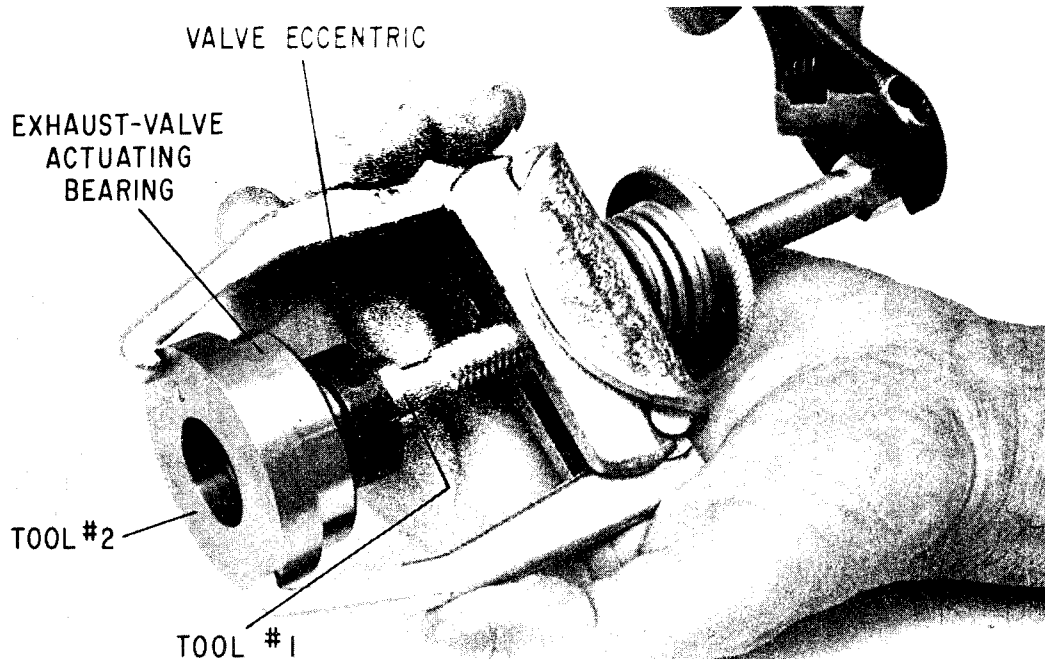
INSTALLING THE EXHAUST-VALVE ACTUATING BEARING
